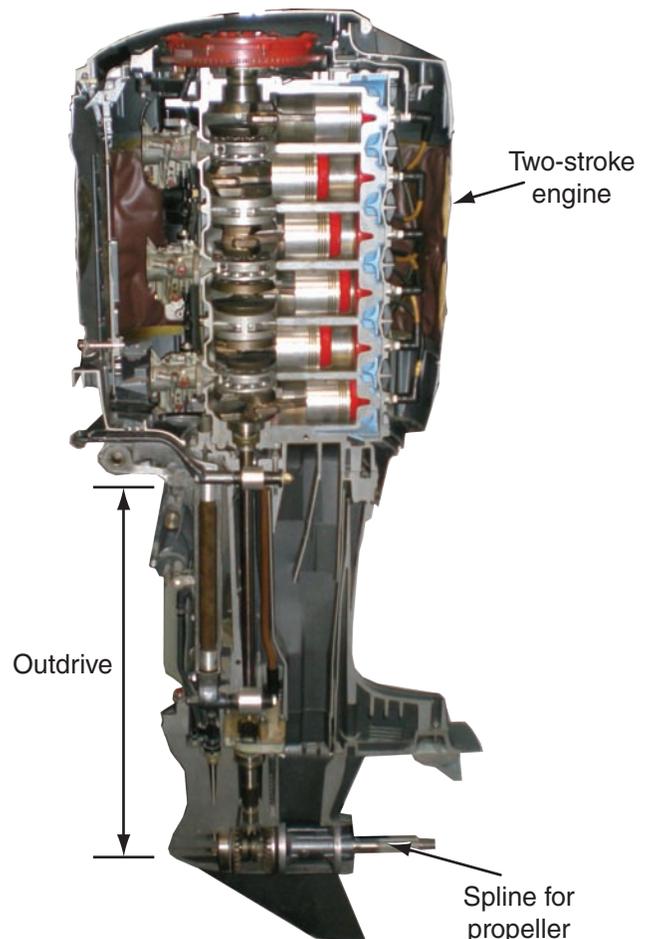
Cutaway of a two-stroke in-line six-cylinder outboard engine.
